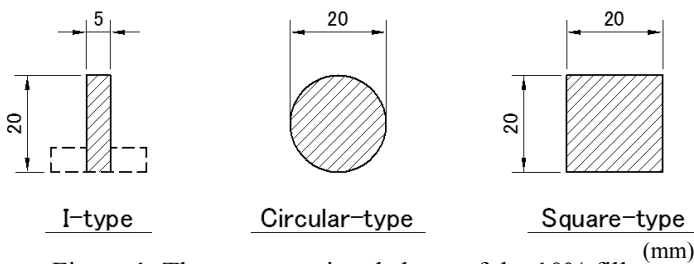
The cross-sectional shape of the 10% fillet (mm)
